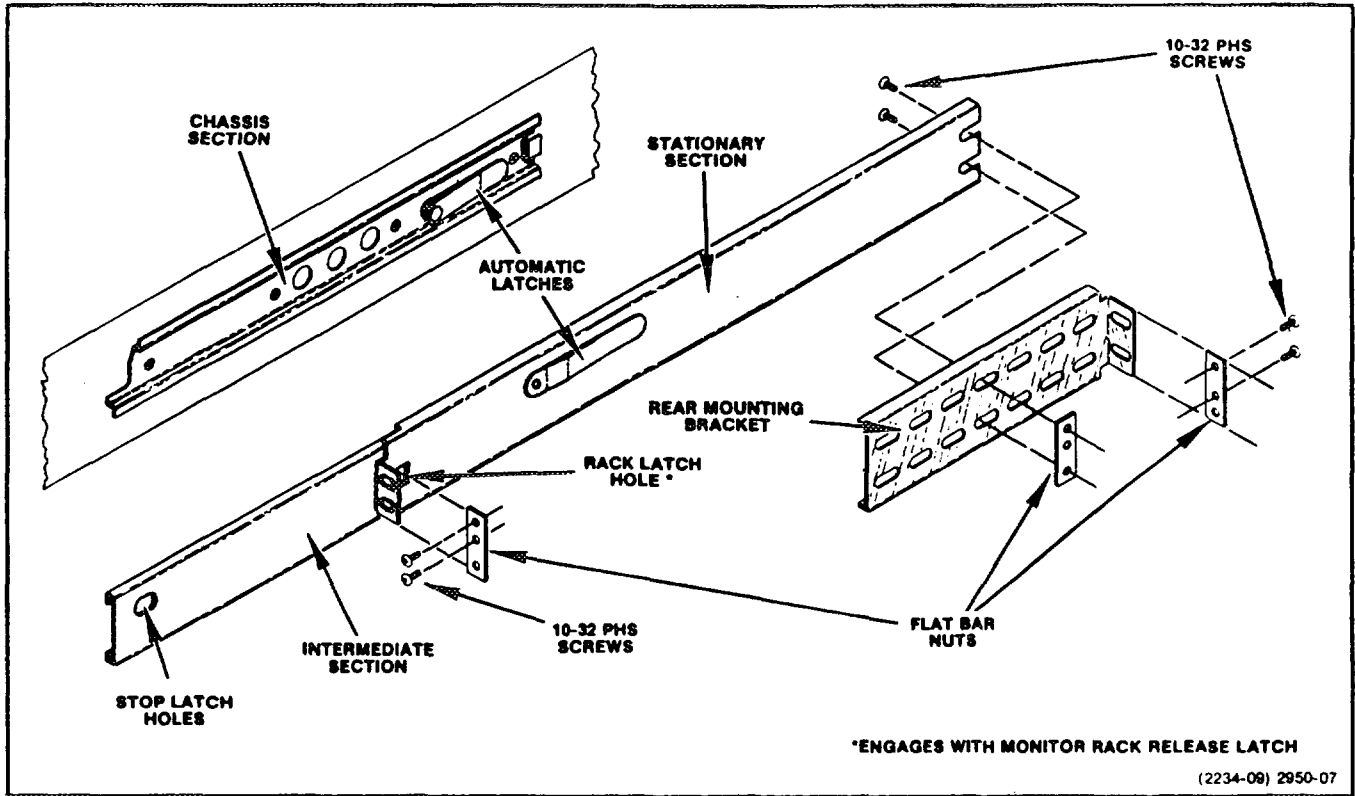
Rackmount slide detail. If the rack has tapped holes, the bar nuts are not required.
